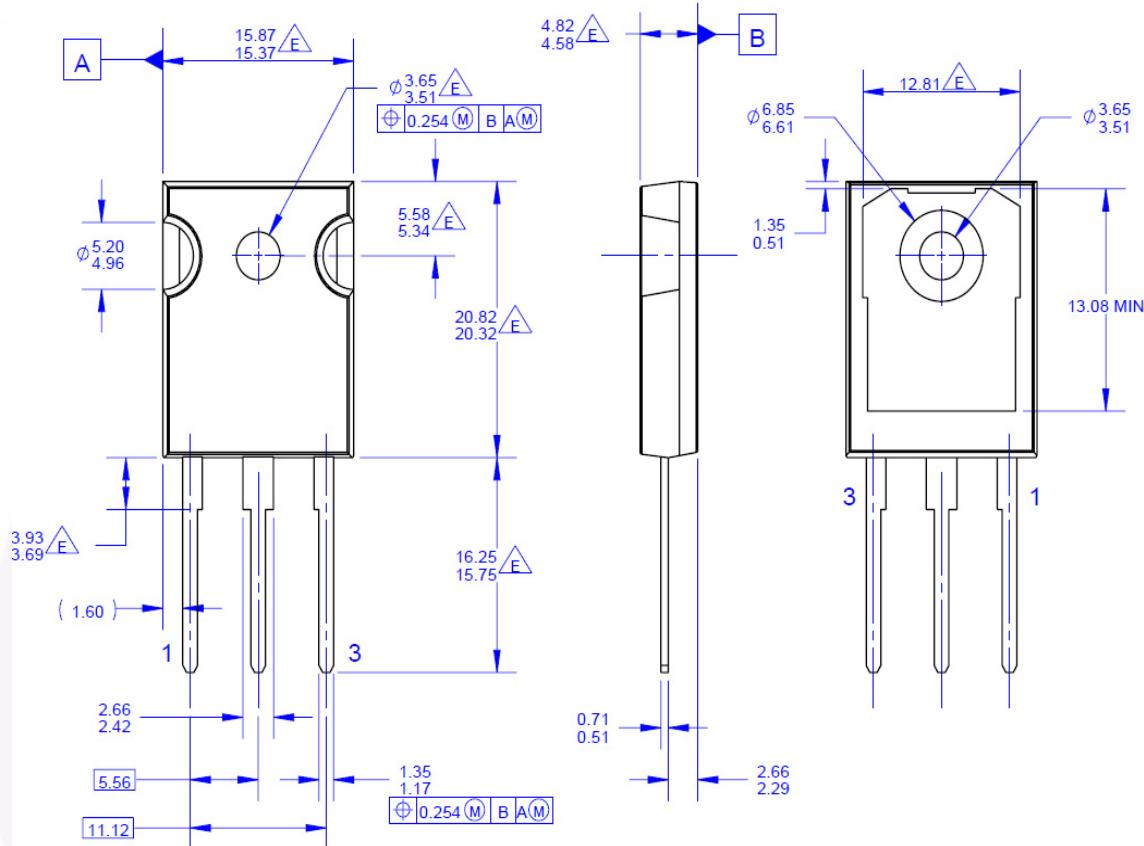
TO-247, Molded, 2LD, Jedec Option AB
